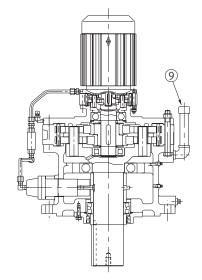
Type CVVM (Vertical, Gearmotor), Double Reduction (Example: Frame size 6225DA)
